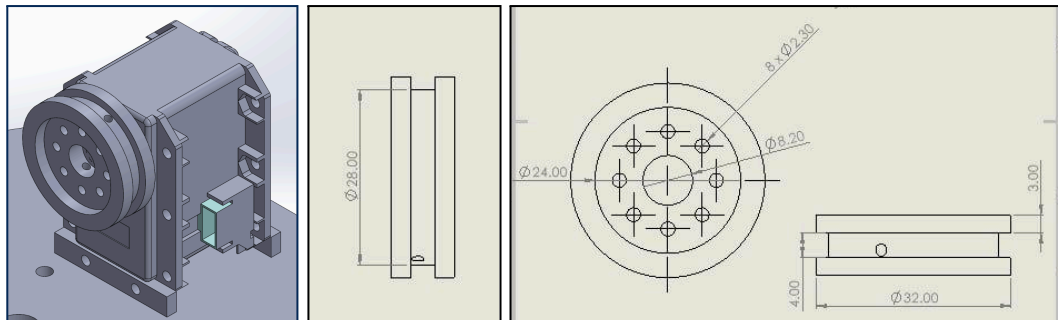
The 3D model and drawing of the tendon pulley attached to the motor
